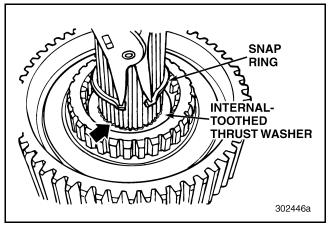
Installing Lo-Range Gear Hub Shaft Snap Ring
